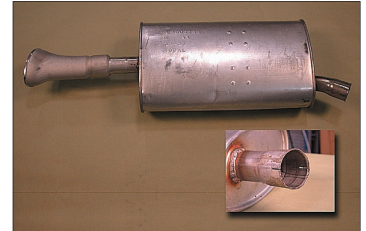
This factory replacement muffler, for a vehicle with a welded one-piece exhaust system, is designed to attach with a slip-fit and clamp.
